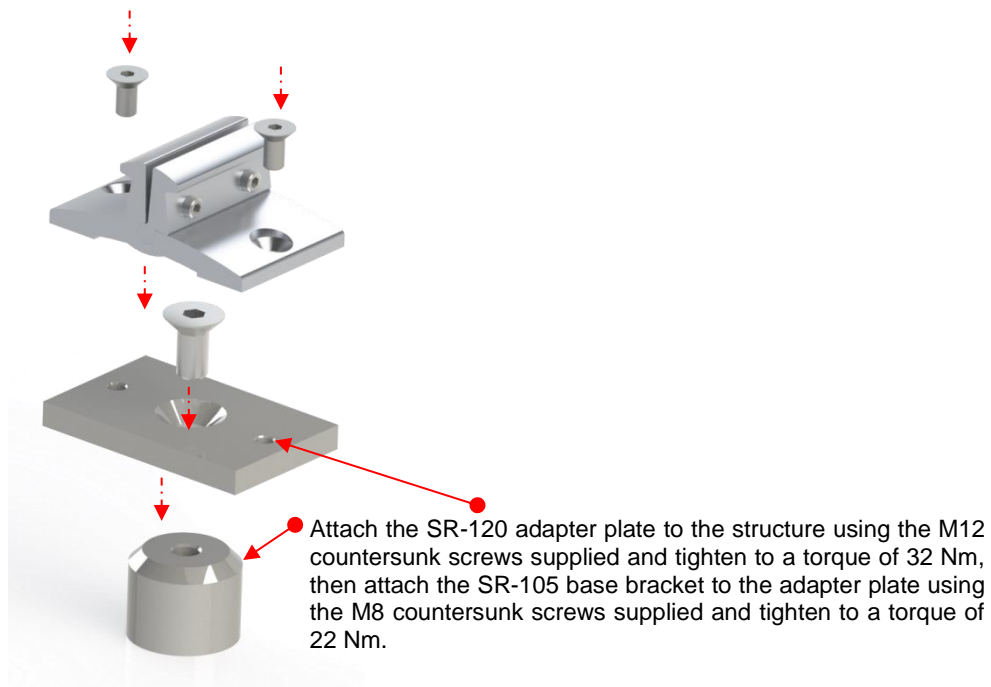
Mounting base console SR-105 on adapter plate SR-120
